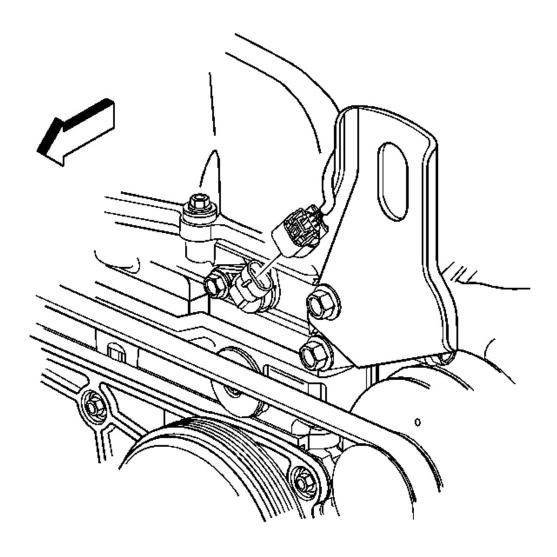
View Of Intake CMP Sensor Engine Wiring Harness Connector Courtesy of GENERAL MOTORS CORP.
